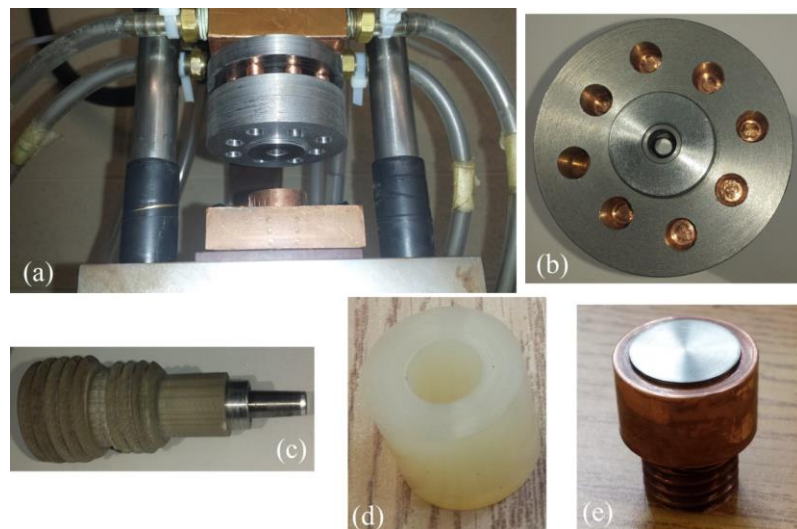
A set of photographs of die-less clinch tooling; (a) assembled tool set mounted on the test machine, (b) bottom view of the tooling showing the eight electrodes, (c) punch, (d) compression urethane spring, and (e) flat anvil.
